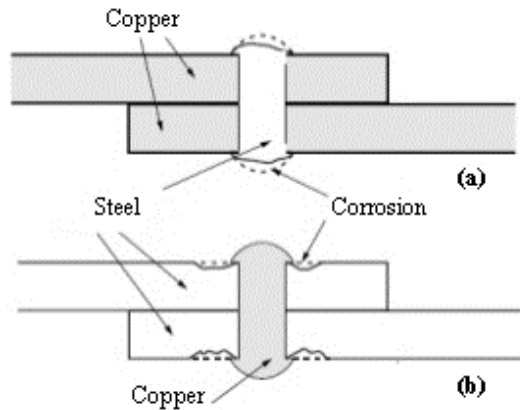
Galvanic coupling caused by riveting with dissimilar metal: (a) steel rivets on copper plates and (b) copper rivets on steel plates. [80]
